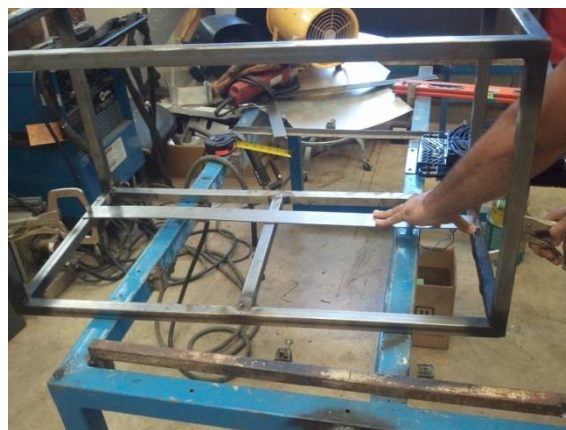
A rectangular plate of 2"W x 1/8" thickness welded to mount the ignition coil, oil filter and the oil catch can.
